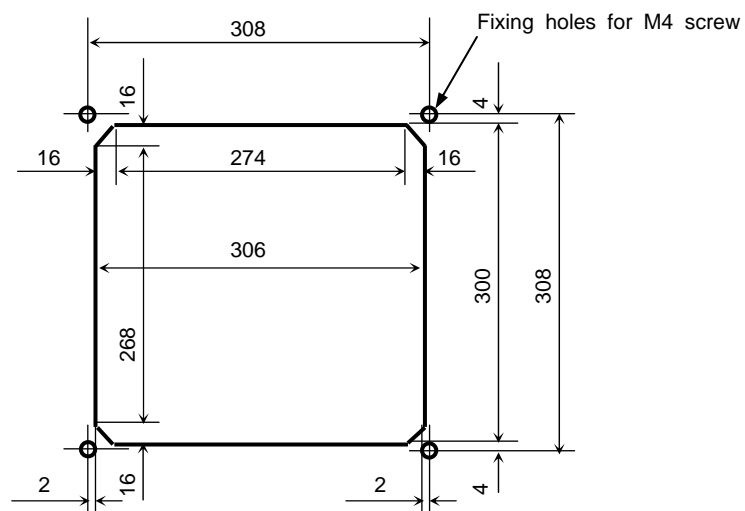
Dimensions of opening and fixing holes for flush mounting
